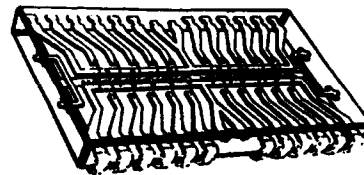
Small-outline-J-lead (SOJ) package with LOC design
